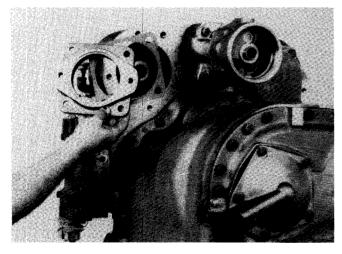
Install new auxiliary pump adaptor gasket and adaptor.
